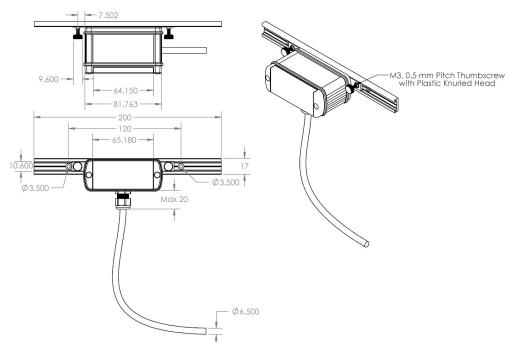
48mm Sensor Head Assembly Dimensions (All Dimensions are in mm)
